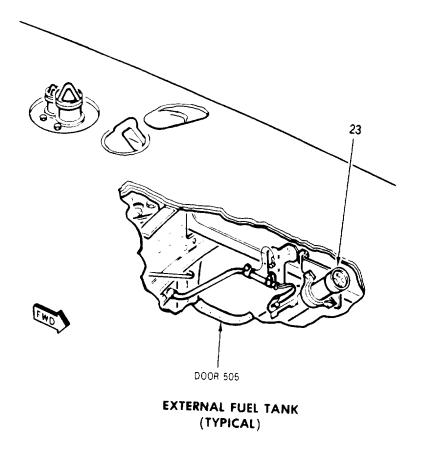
Fuel Quantity Gaging System Component Locator (Sheet 8)
